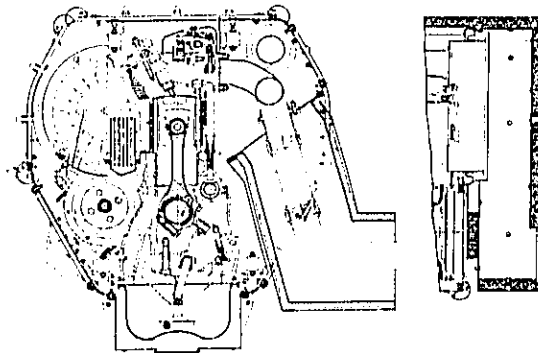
Sectional drawings of a low-noise air-cooled 6-cylinder inline diesel engine featuring an additional sound reducing enclosure (9)
